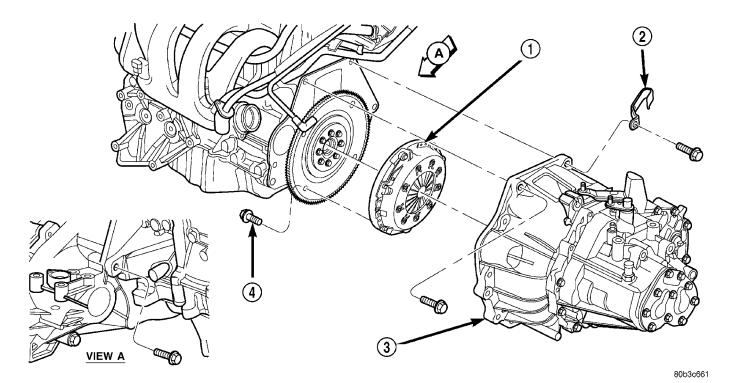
Transaxle Removal/Installation (2.0/2.4L Shown)
